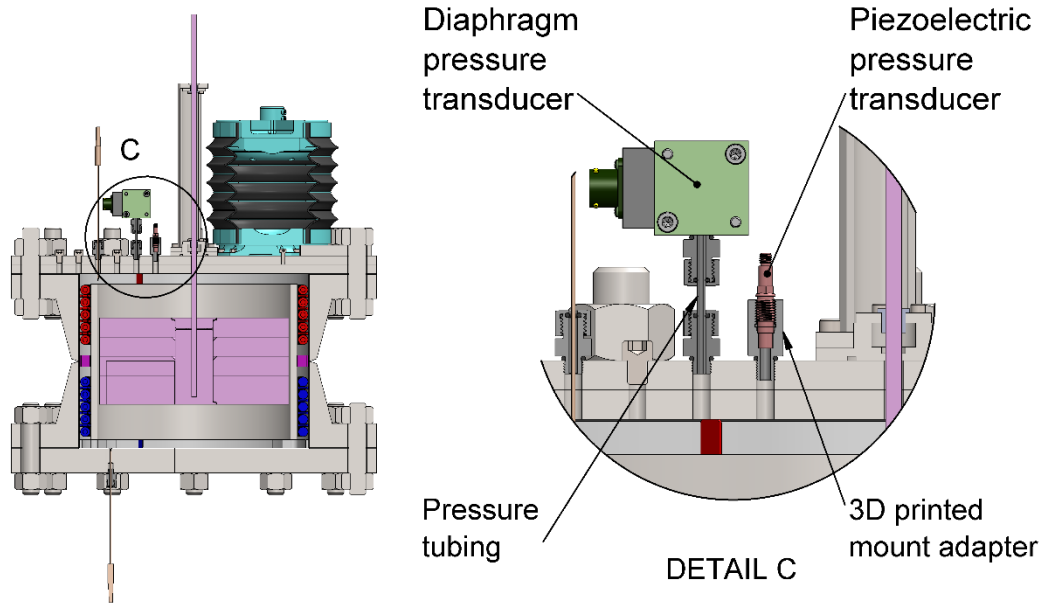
Section view engine body showing the location of the working fluid pressure sensors
